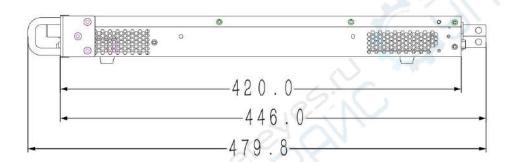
Side Dimension(mm) (Specification 50A and 25A)
